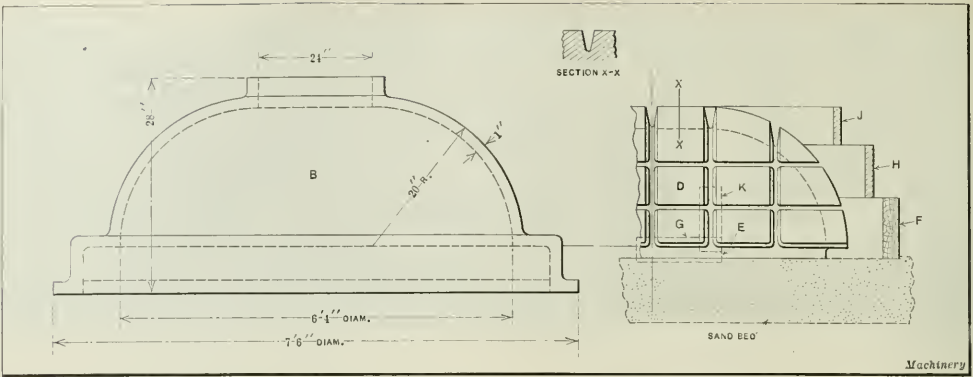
Tank-head Casting and Method of molding Arbor or Sand-bar for Cope
